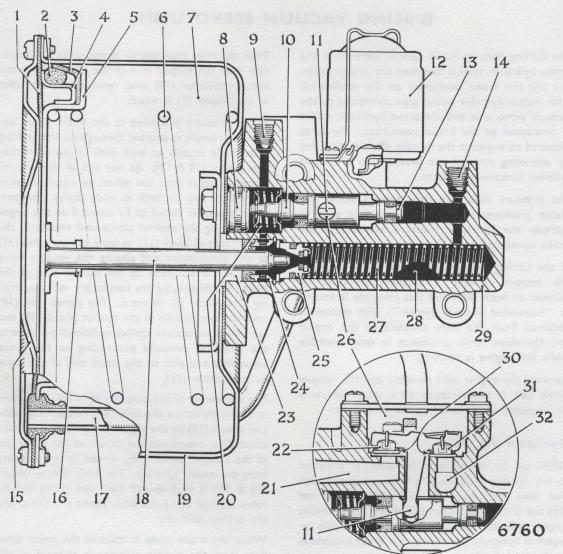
Cross section view of Girling Vacuum Servo Unit
